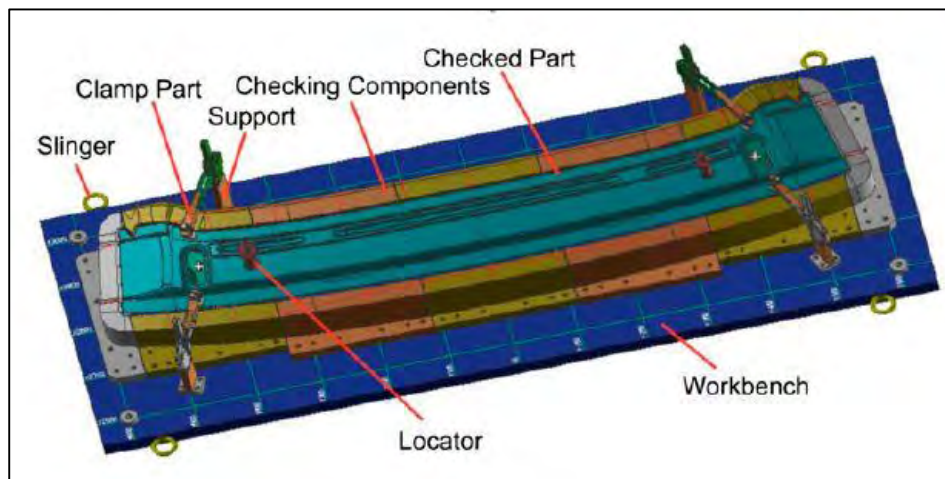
Example of checking fixture for car fender part (Hu Cai-qi *et al.*, 2005).
